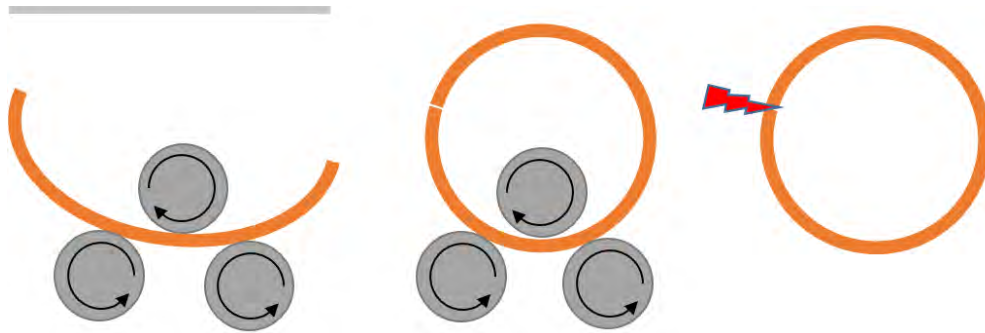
Three piece can rolling and welding depiction.
